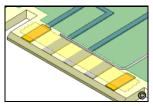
Apply Kapton Tape then solder a wire to the edge of the contacts needing plating.
